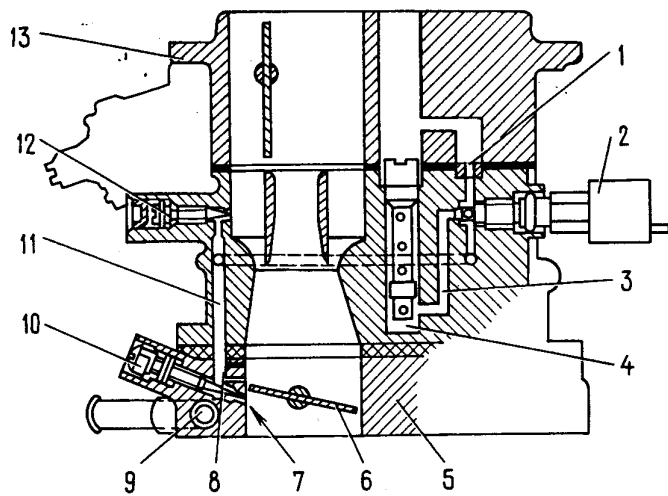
Idling System of Carburettor 2106-1107010:
